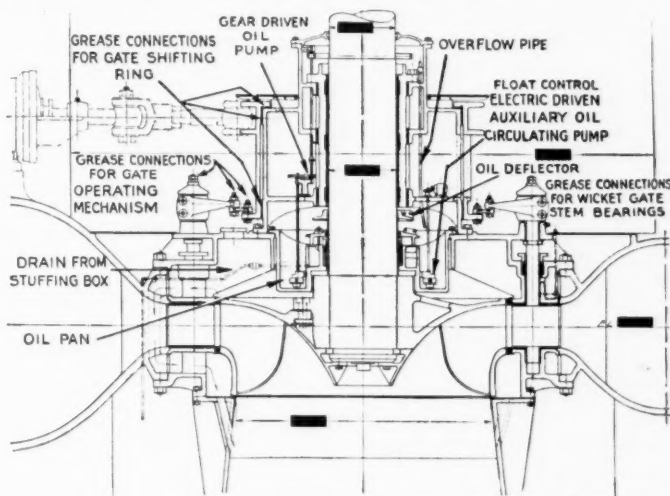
Cross section of a hydraulic turbine with the essential parts pertaining to lubrication indicated in detail.
